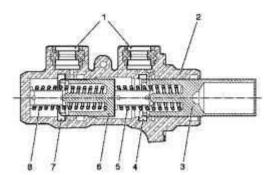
General view of the tandem master brake cylinder: 1 - socket compensating reservoir, 2 - building a tandem master brake cylinder type, and 3 - the primary piston (piston pusher), 4 - sealing sleeve of the primary circuit; 5 - compression springs, 6 - secondary piston (floating piston) 7 - sealing sleeve in the secondary circuit, 8-return spring
